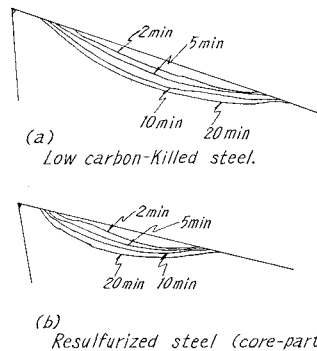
Tool-face crater development for H.S.S. tools cutting Killed steel and Resulfurized steel.
